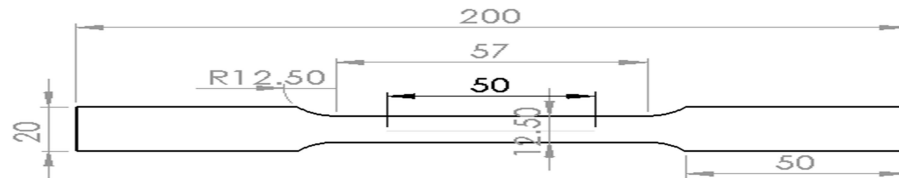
Tensile test specimen as ASTM E8M/16a
